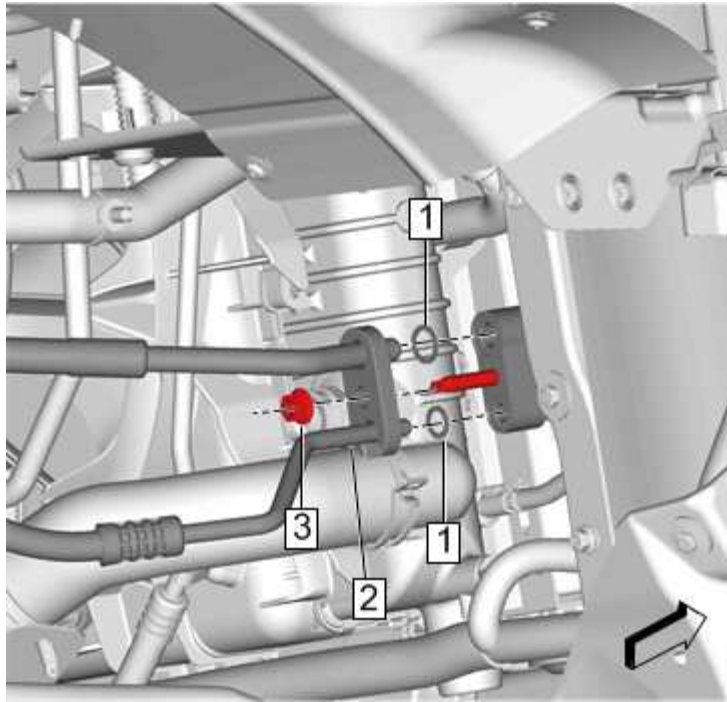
Air Conditioning Compressor Hoses And Evaporator Tube
